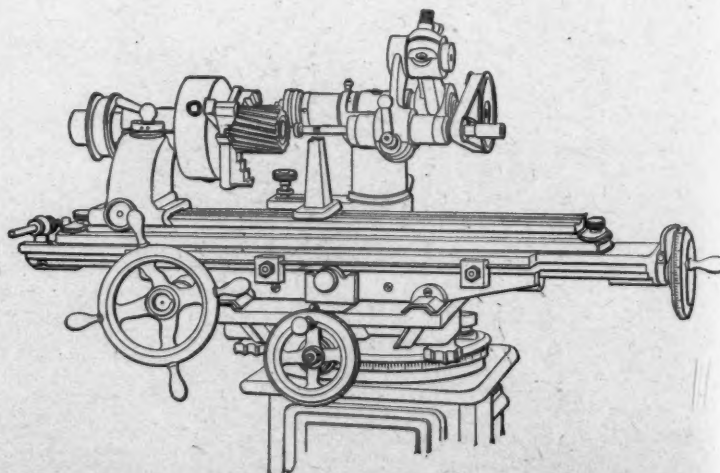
SPINDLE AND WORK ADJUSTED READY FOR INTERNAL GRINDING.
